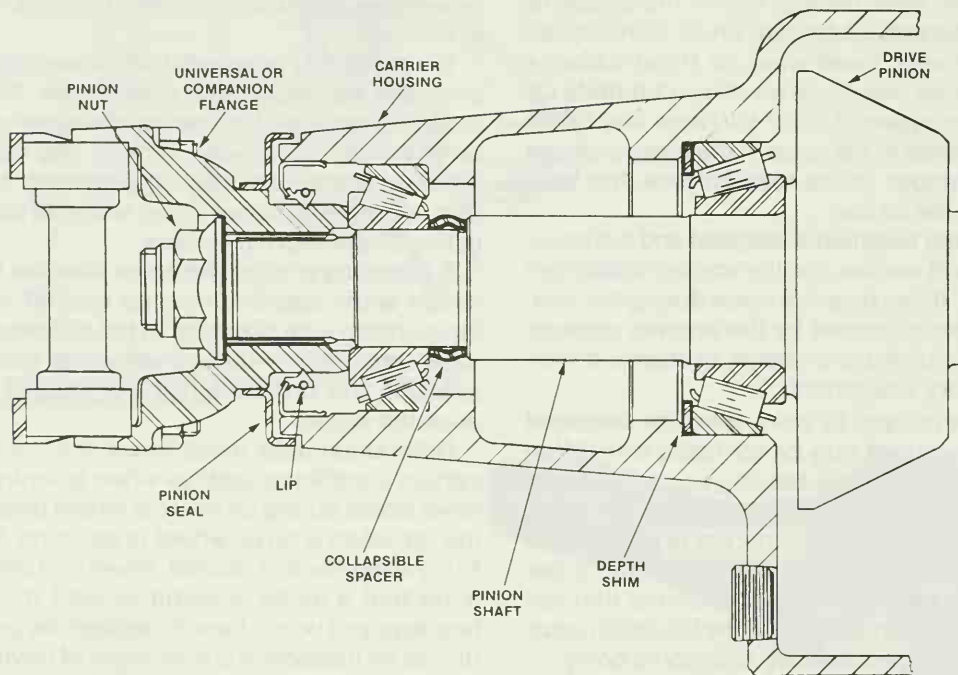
The pinion seal prevents lubricant from leaking out around the pinion shaft. (American Motors Corporation)
